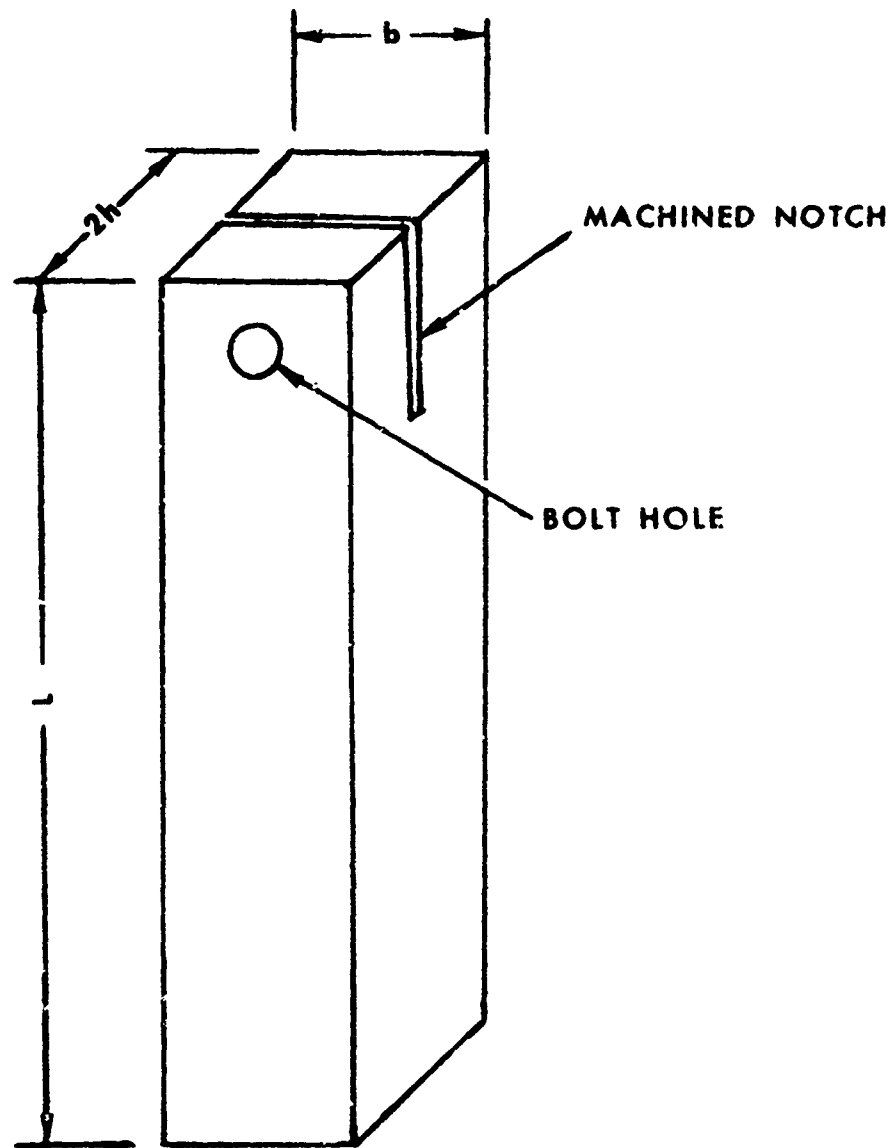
Double Cantilever Beam Stress Corrosion Cracking Specimen
